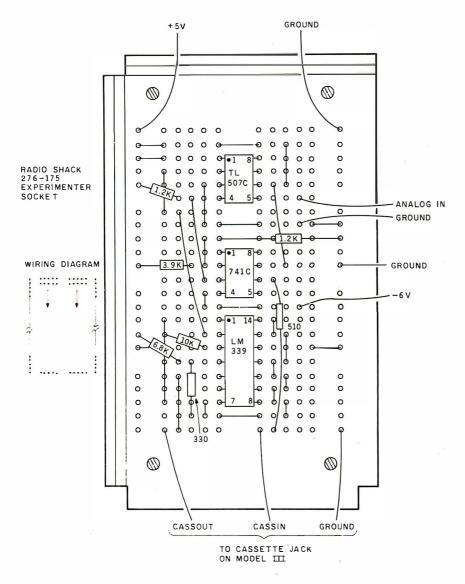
The simple and inexpensive ADC is constructed on a Radio Shack 276-175 prototype board.
